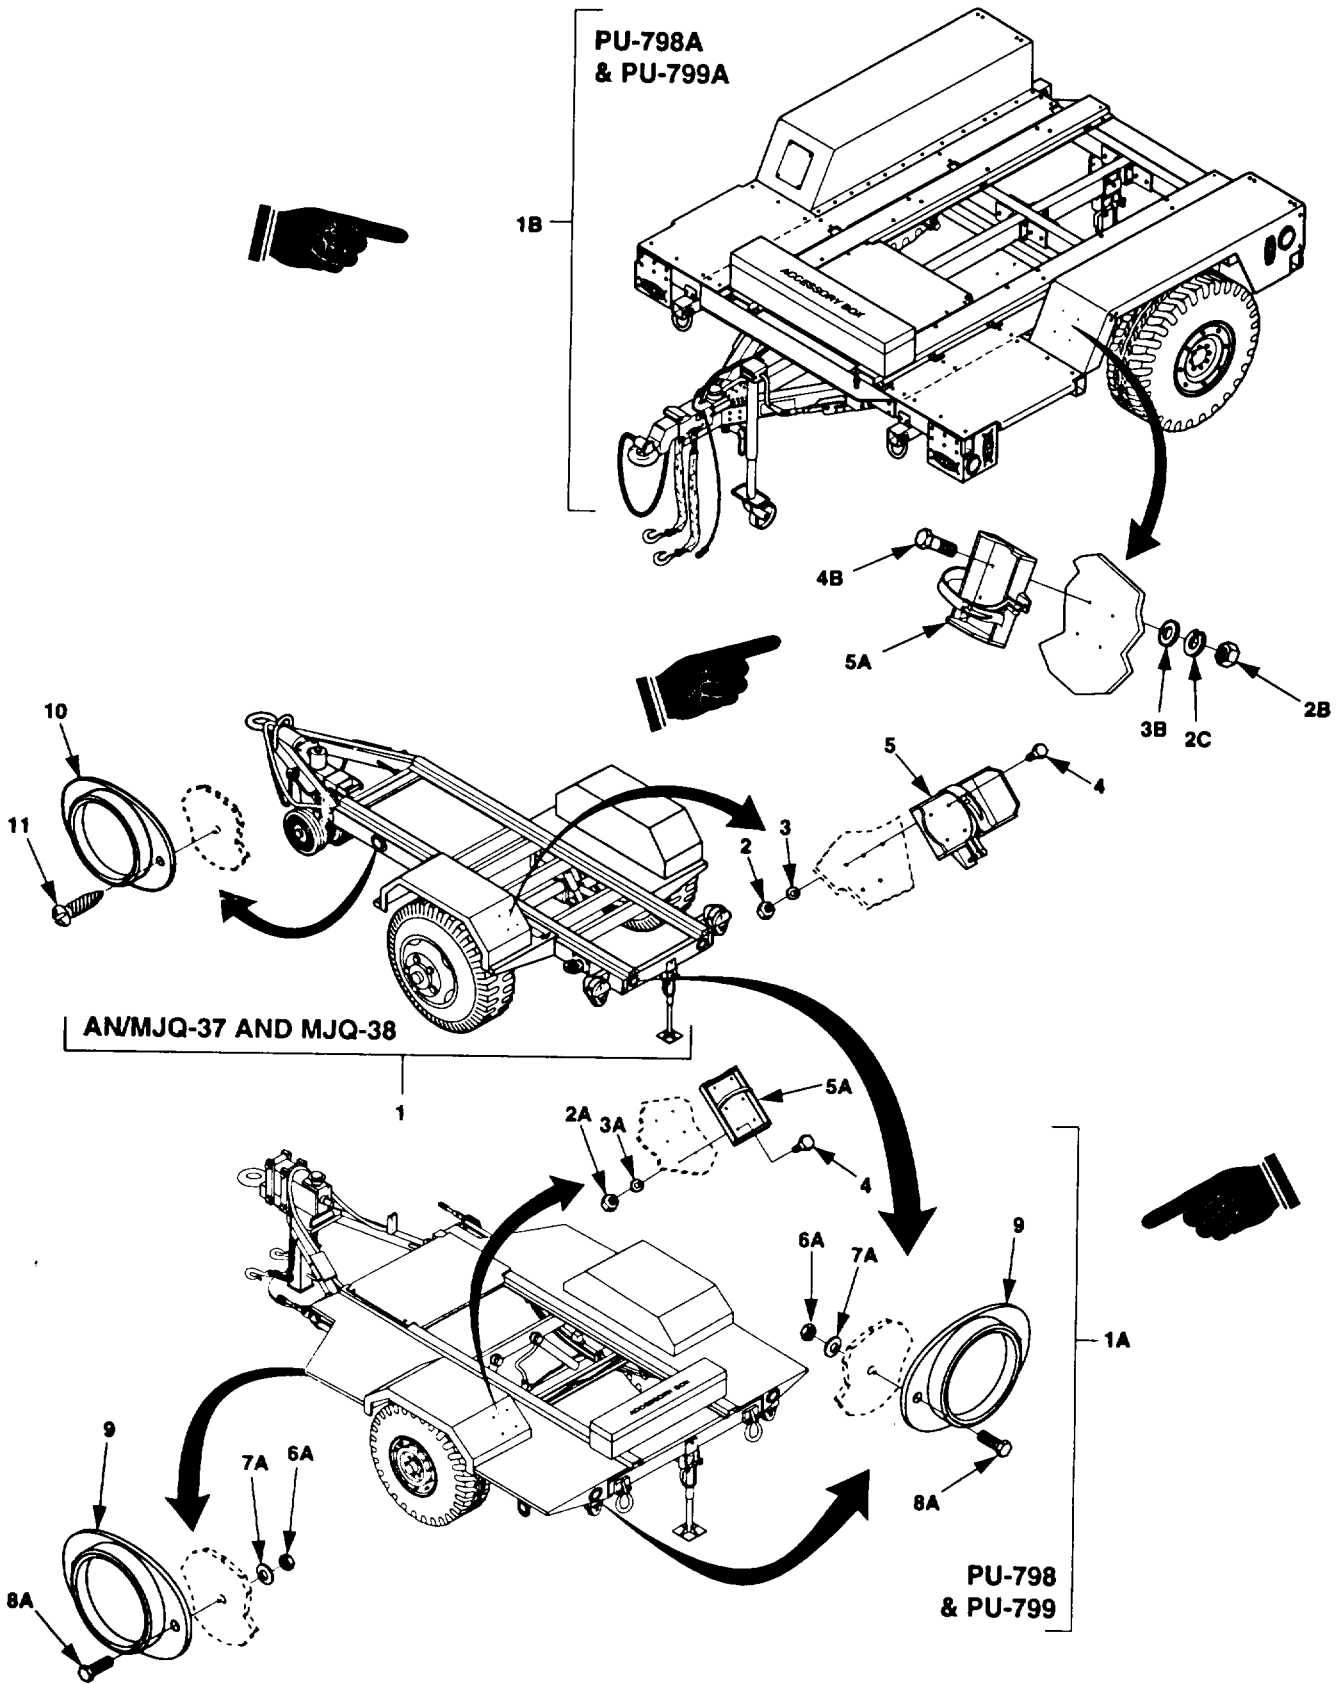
Power Plant/Power Unit Trailer Assembly (Sheet 2 of 2)
